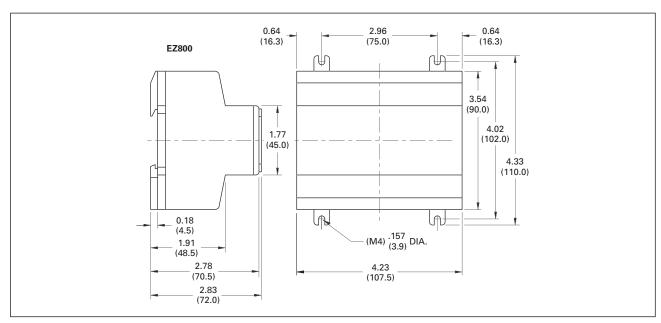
EZ800 Series Dimensions in Inches (mm), Drawing Number MD05013003E
